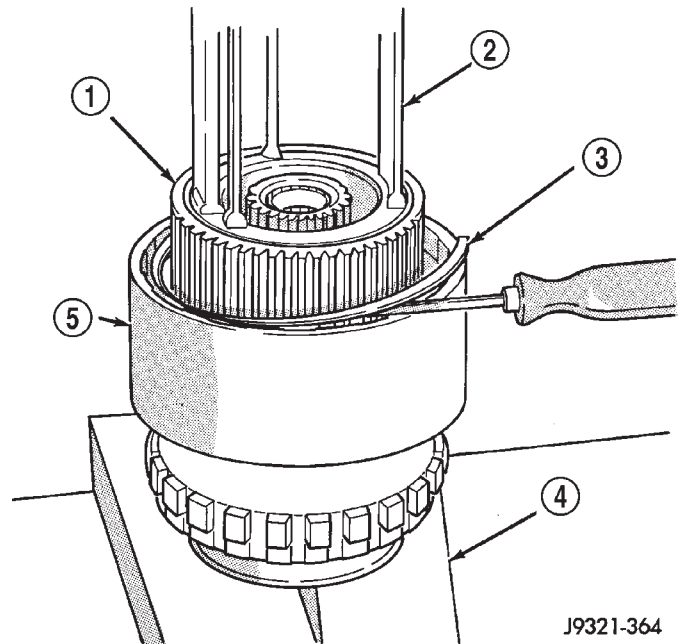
Direct Clutch Pack Snap-Ring Removal
